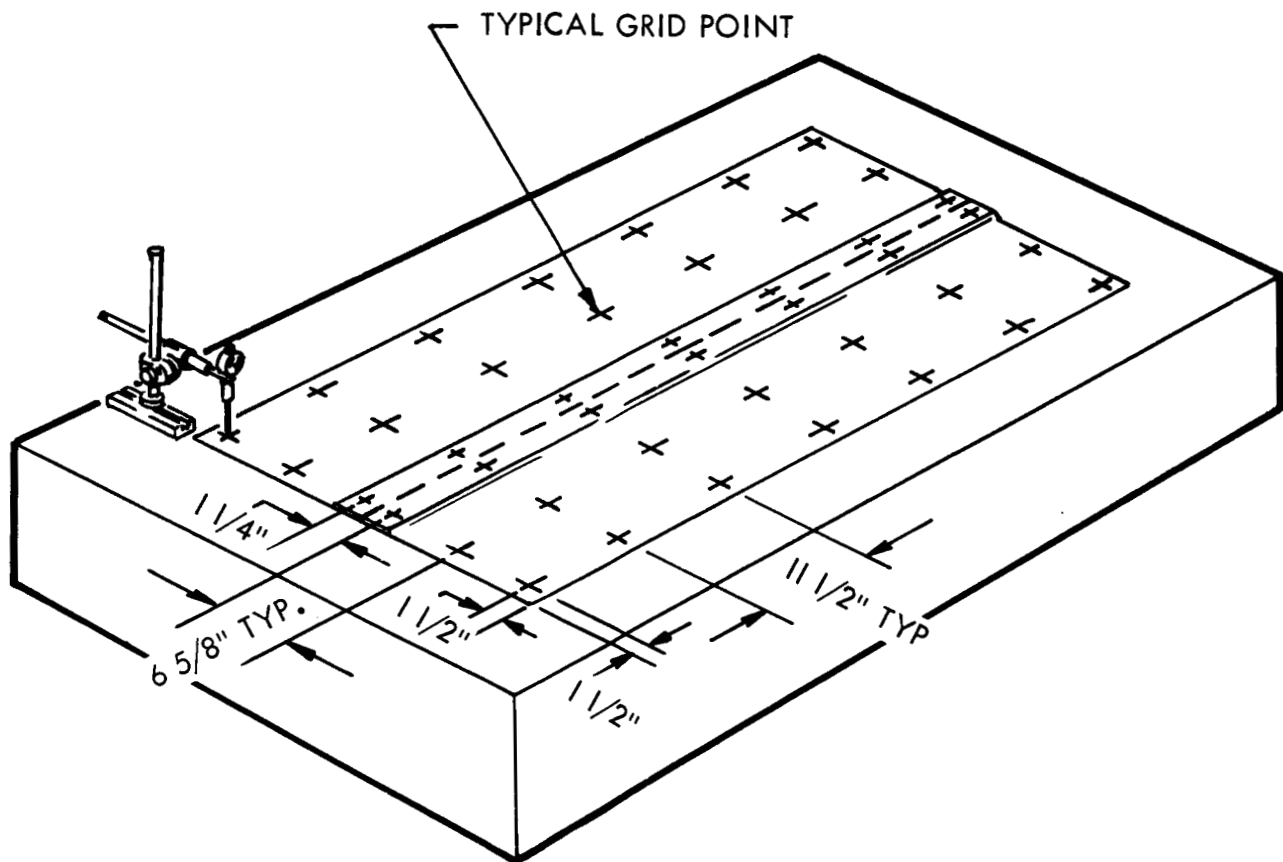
Measuring Distortion of 32 - X 72-Inch Test Weldment
